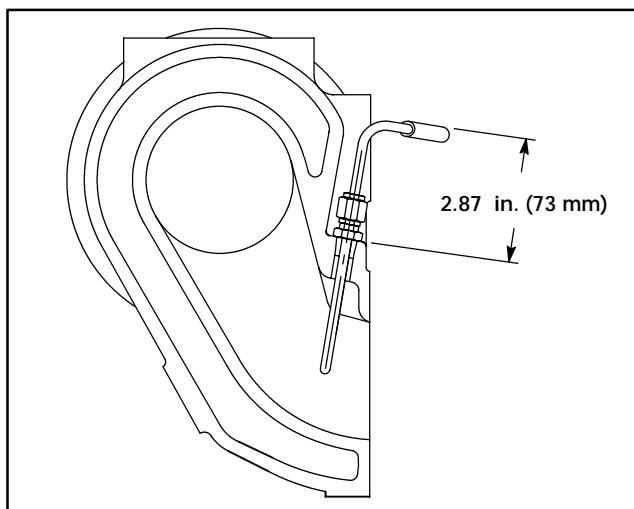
Inline Engine Exhaust Thermocouple Installation
